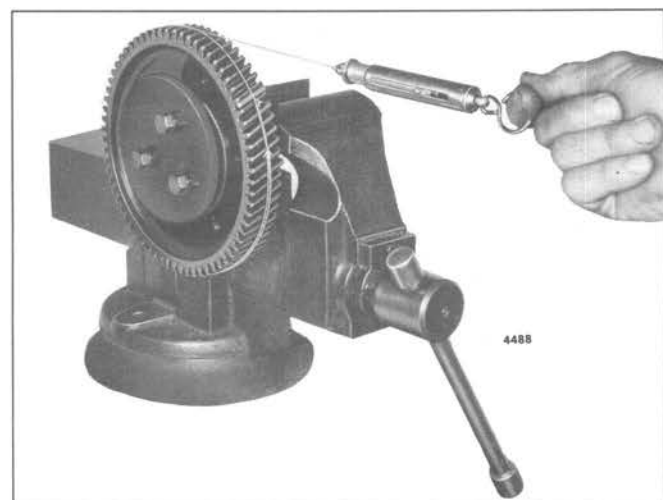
Checking Idler Gear Bearing Pre-Load
